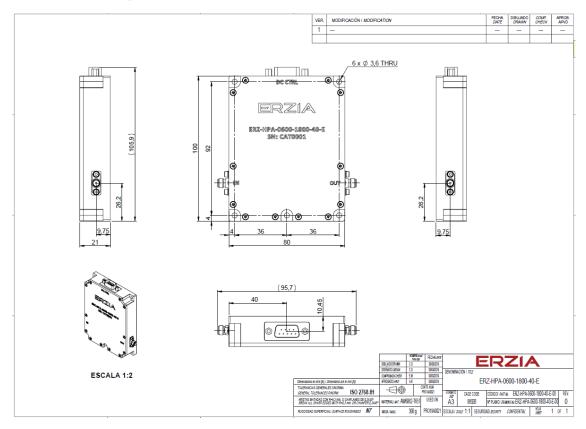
ERZ-HPA-0600-1800-40-E Outline Drawing
